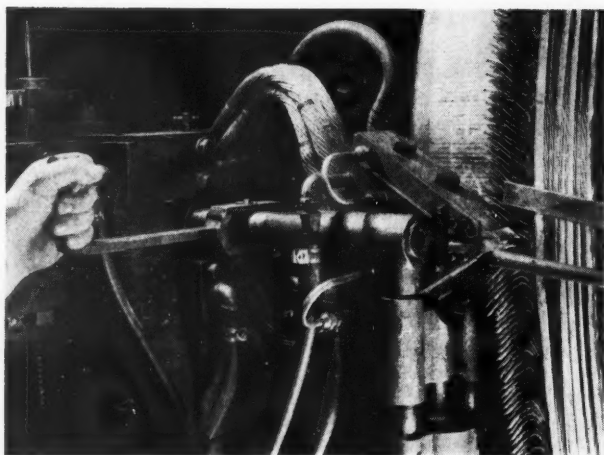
Tong Brazing with Phos - Copper Showing Close-Up of Head in Operation
